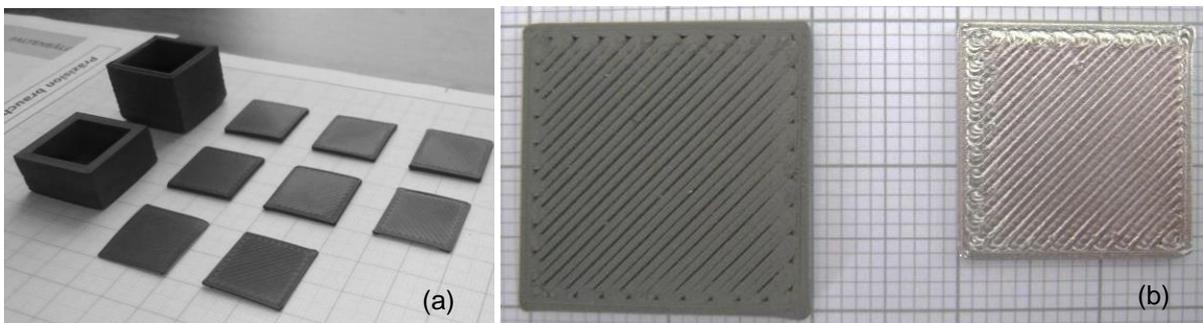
(a) Printed parts produced with feedstock materials FS03 and FS04; (b) greenpart shaped by FFF and final part after debinding and sintering.
